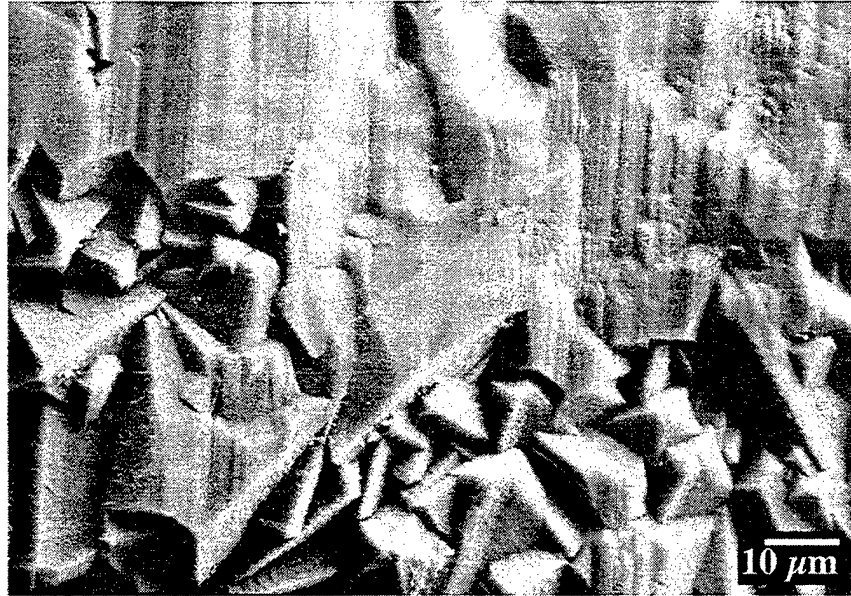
SEM micrographs illustrating typical surface morphologies in the wear regions of a tool insert used to machine cast iron.
